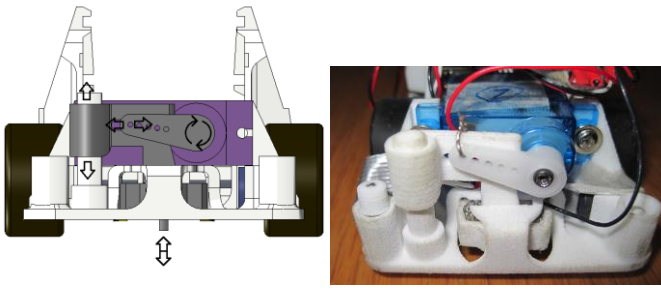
Principle of operation to the left and the actual assembly of the road-connecting assembly
